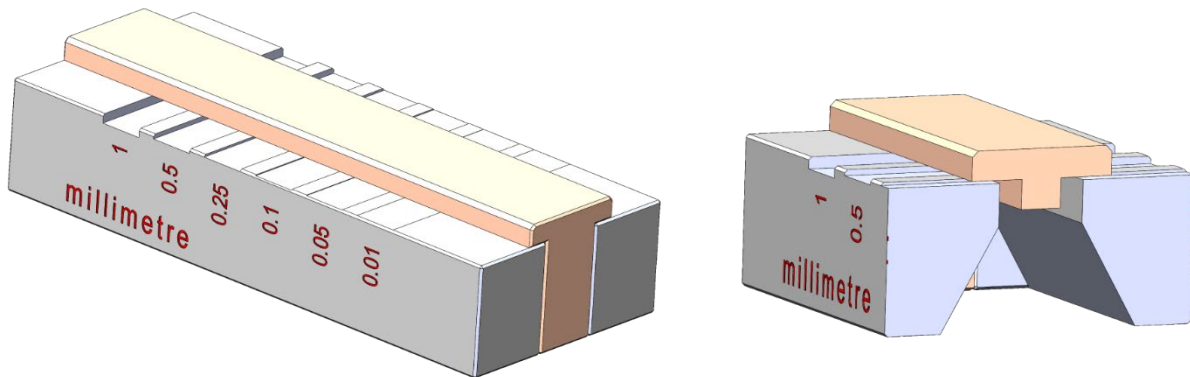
Tolerance demonstrator – Concept 2 (section view shown on right)
